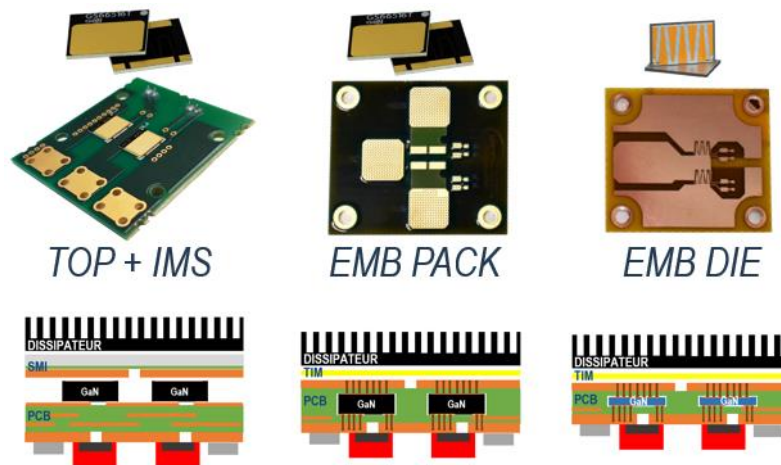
Different PCBs with GS66516T packaged and in bare die embedded the PCB.
